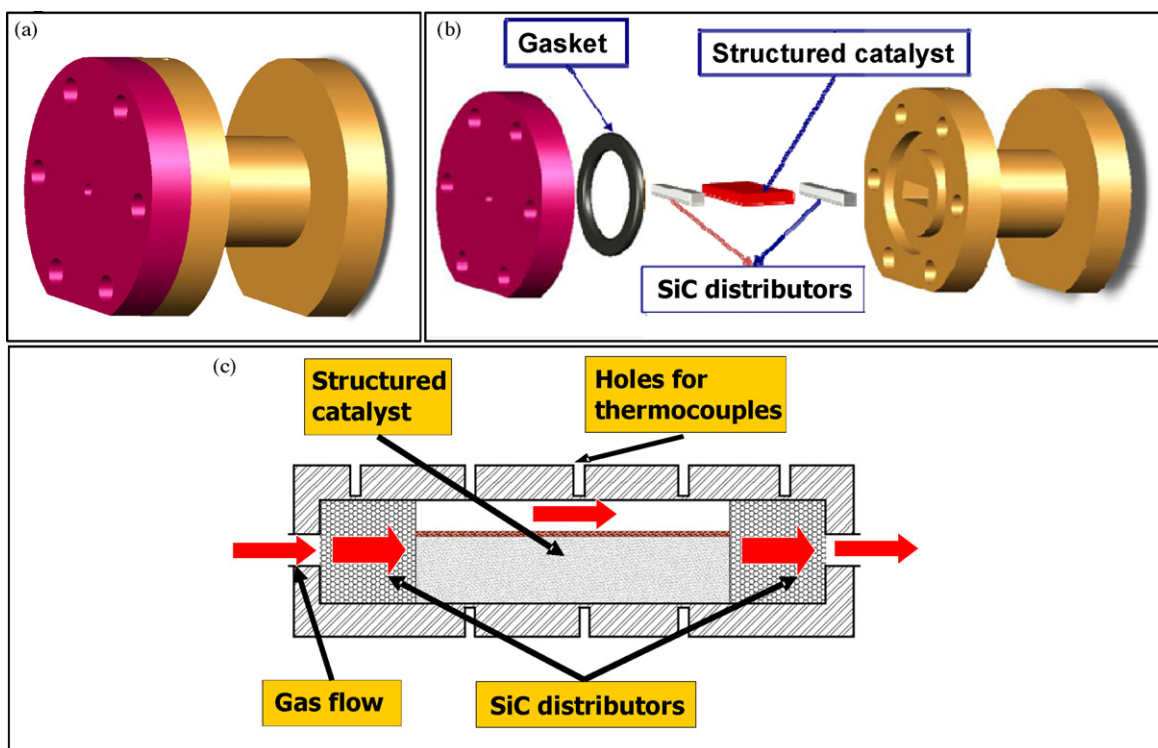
Drawings of the stainless steel reactor (SSR): (a) overall view; (b) explosion view; (c) section and gas pathway.
